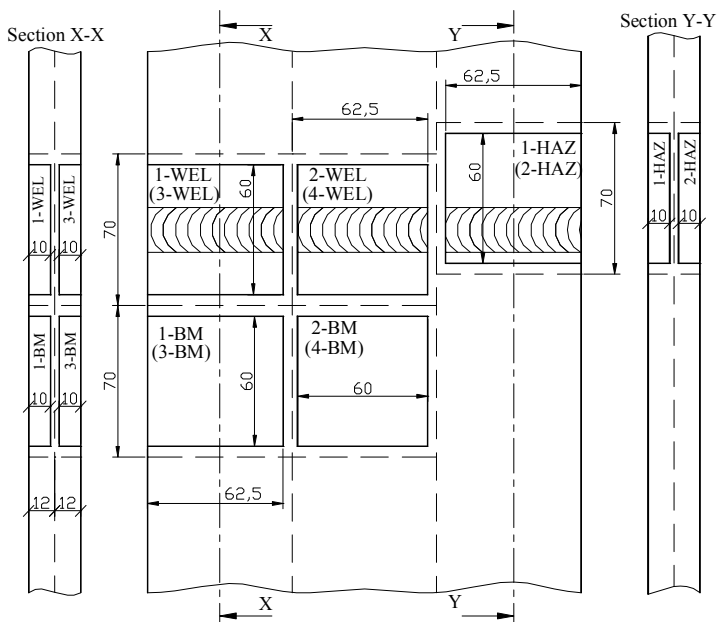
Locations of the CT specimens at the welded plate (dimensions in mm)
